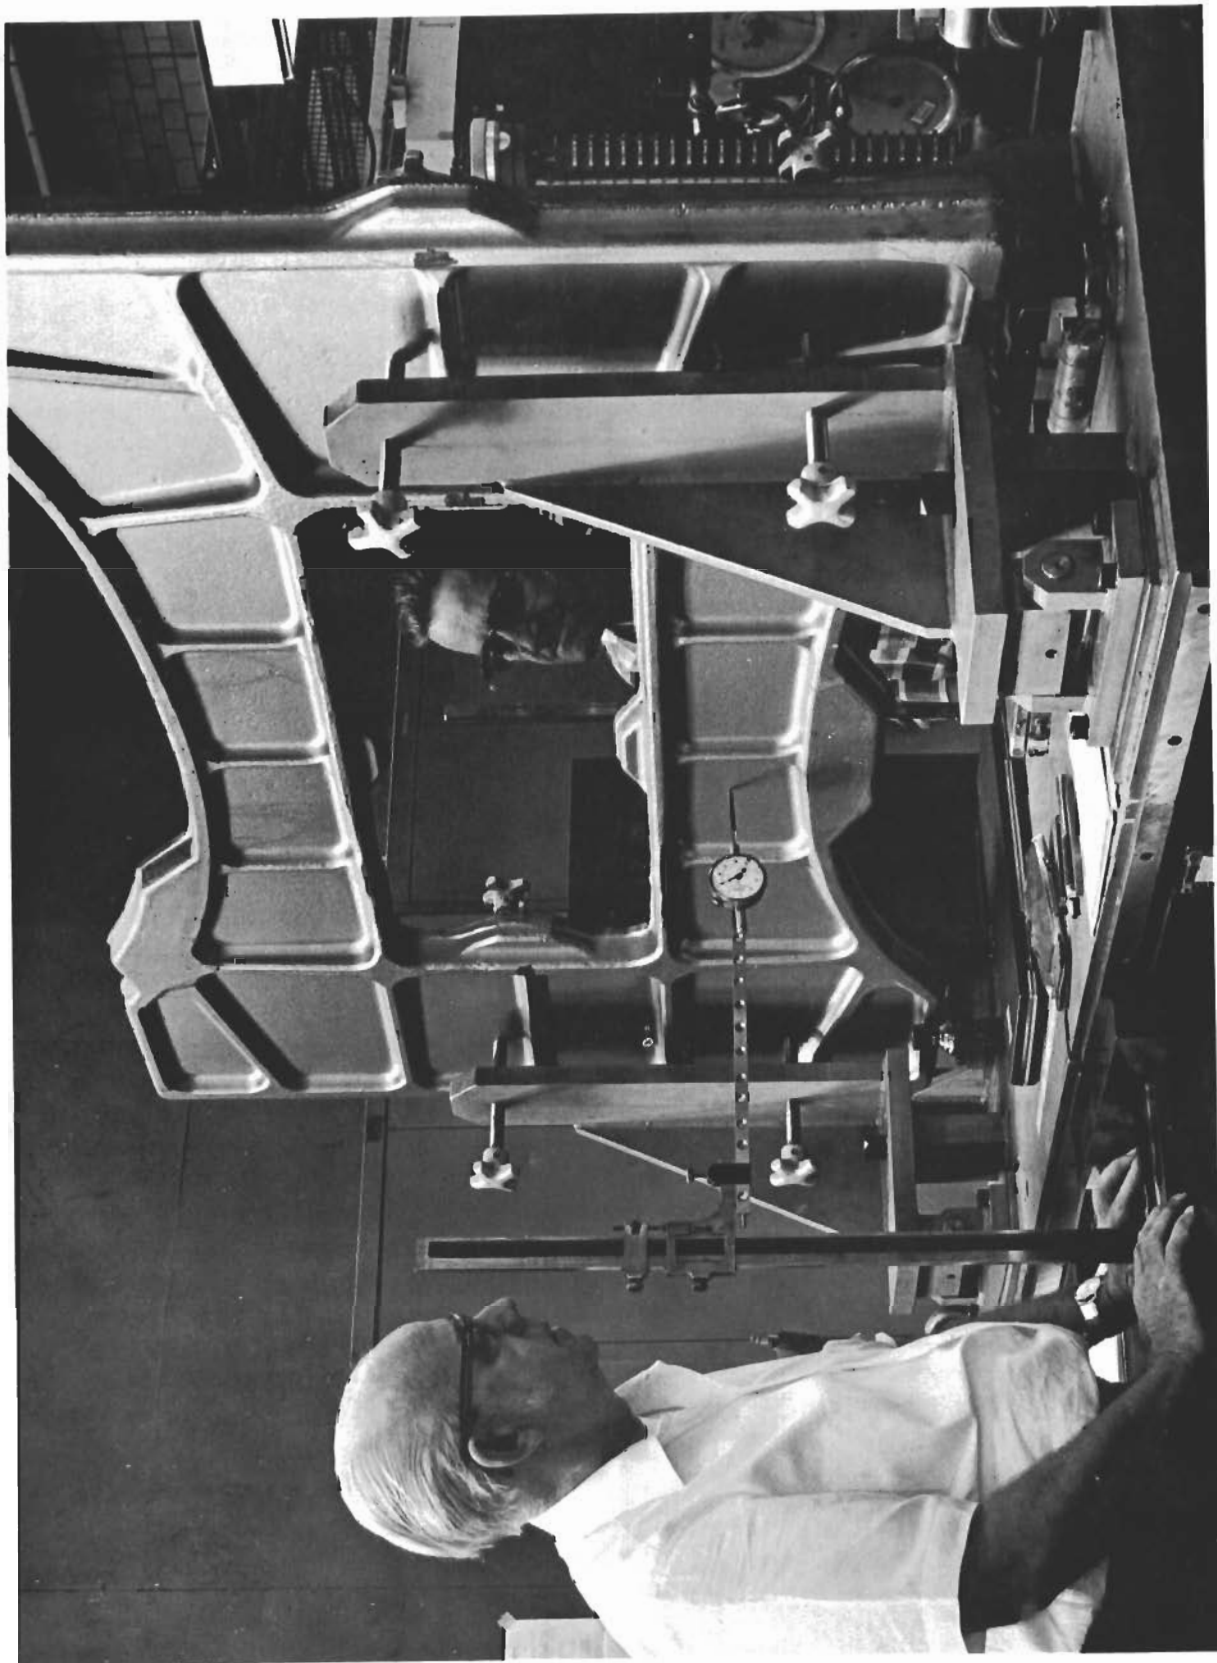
Dimensional Inspection of Ti 6Al-4V Bulkhead Forging Showing Details of Holding Fixture and Gaging Employed.
